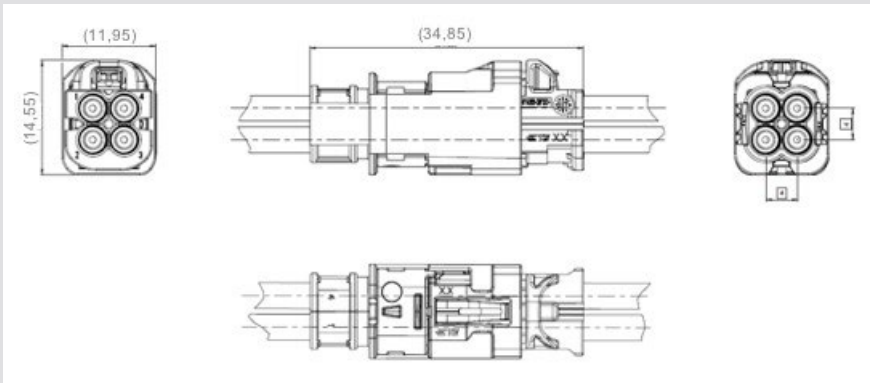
4-position 180° inline interconnection pin housing and dimensions
